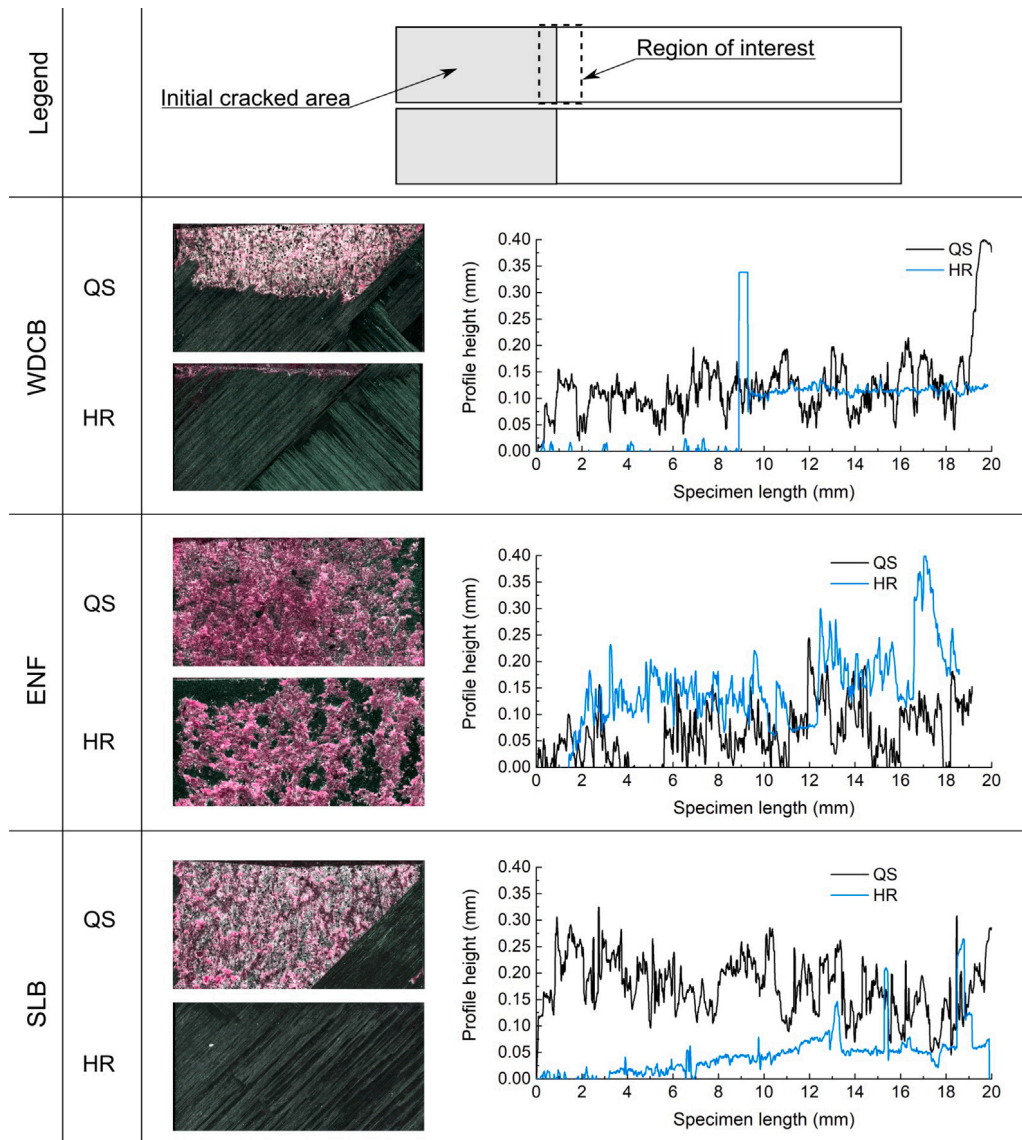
Profile height of representative fractured surfaces for the investigated fracture mechanics experiments.
